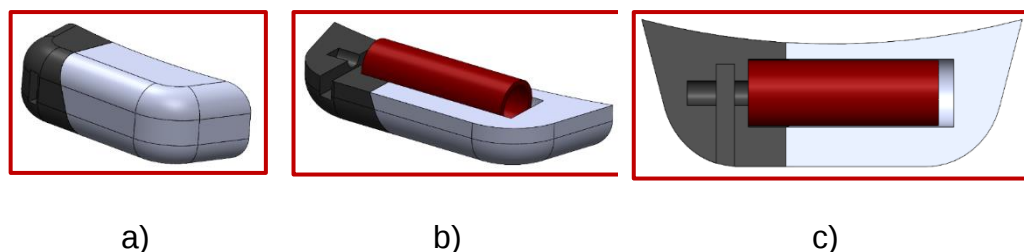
Multiple Figure of one of the components of the Cylindrical Guides: a) Overall View; Overall and Cut View with the pine assembled; c) Top View with the pine assembled.
